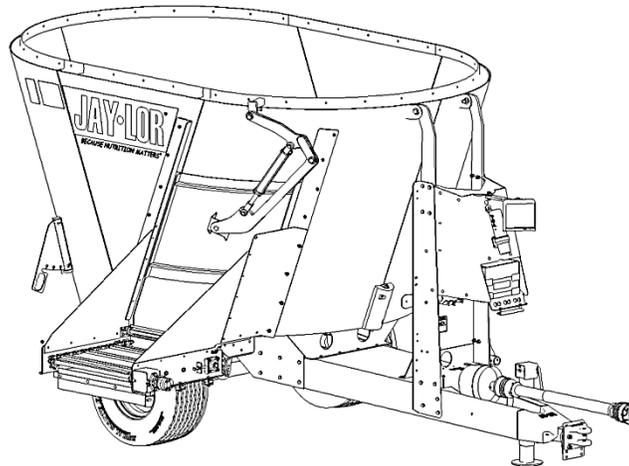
Front Right Corner Door Configuration with 3ft Conveyor
